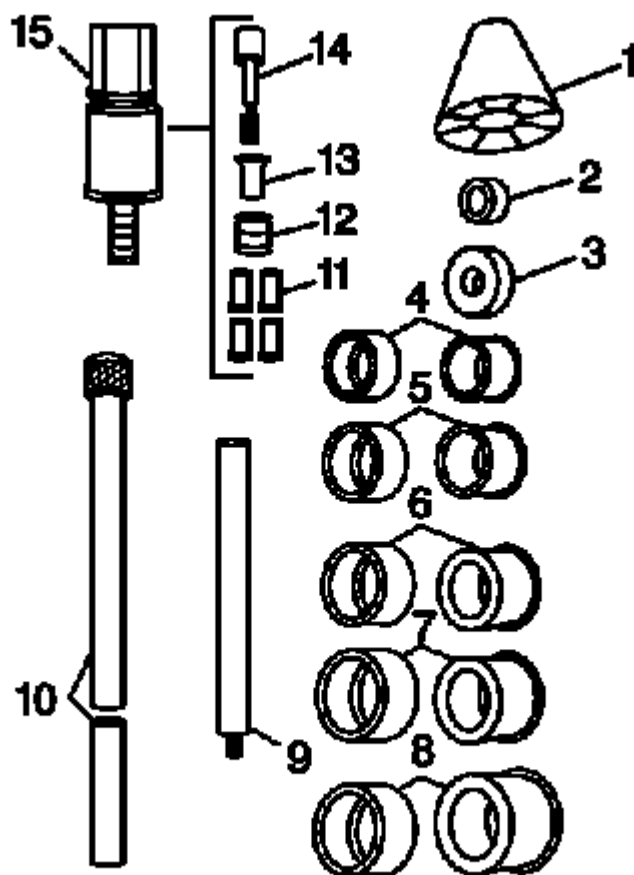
View Of J 33049 Camshaft Bearing Service Kit Components
